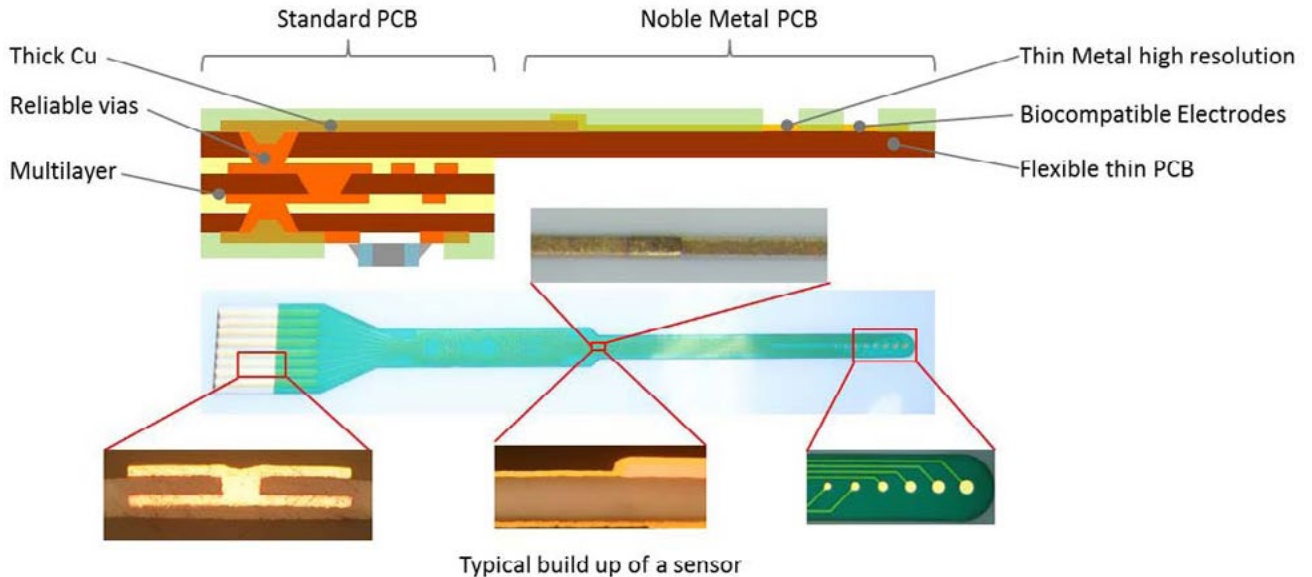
A hybrid PCB combining standard PCB with noble thin film material technology.
